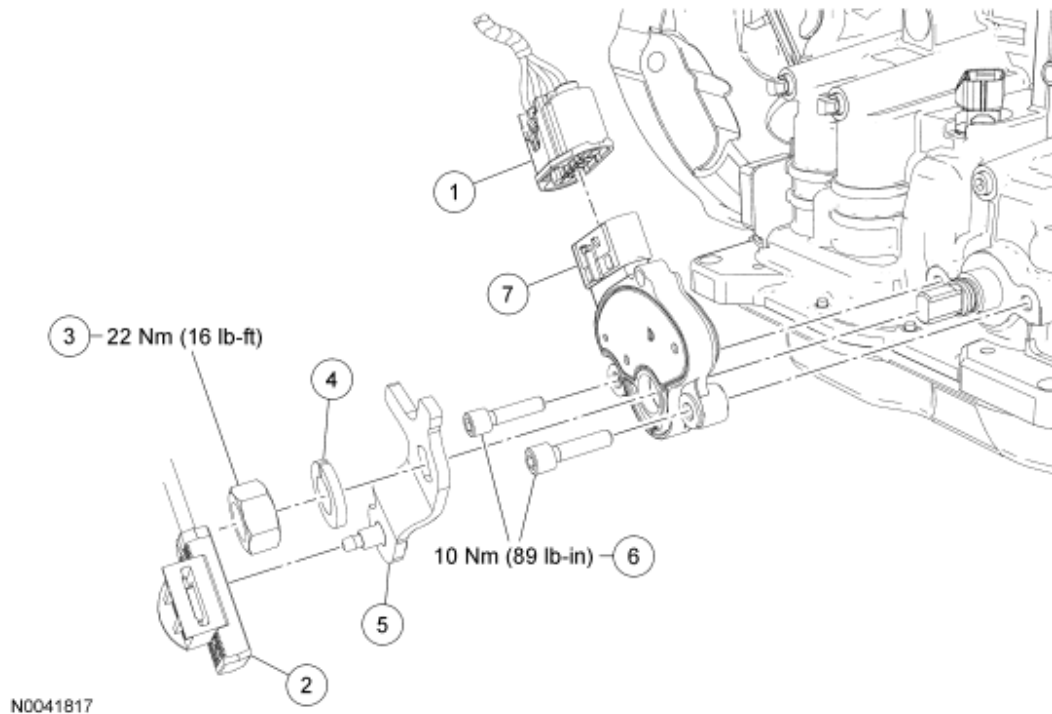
Exploded View Of Transmission Range (TR) Sensor With Torque Specifications
